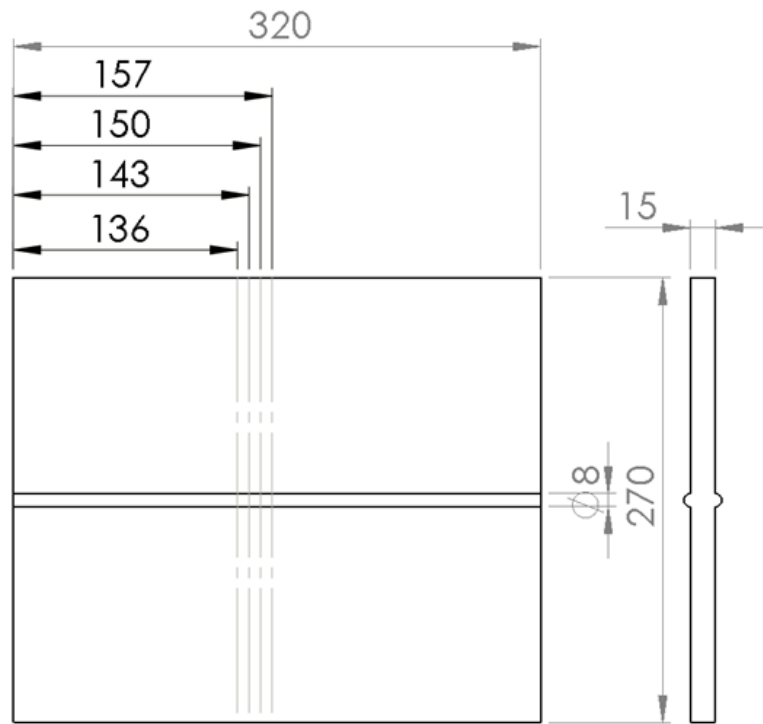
320 x 270 mm plate of 316L stainless steel with double weld bead across the horizontal midline of the plate. The broken lines denote the locations from which MU-A was cut.
